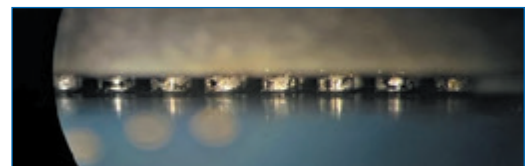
Side D solder balls after rework is done by vapor phase soldering
